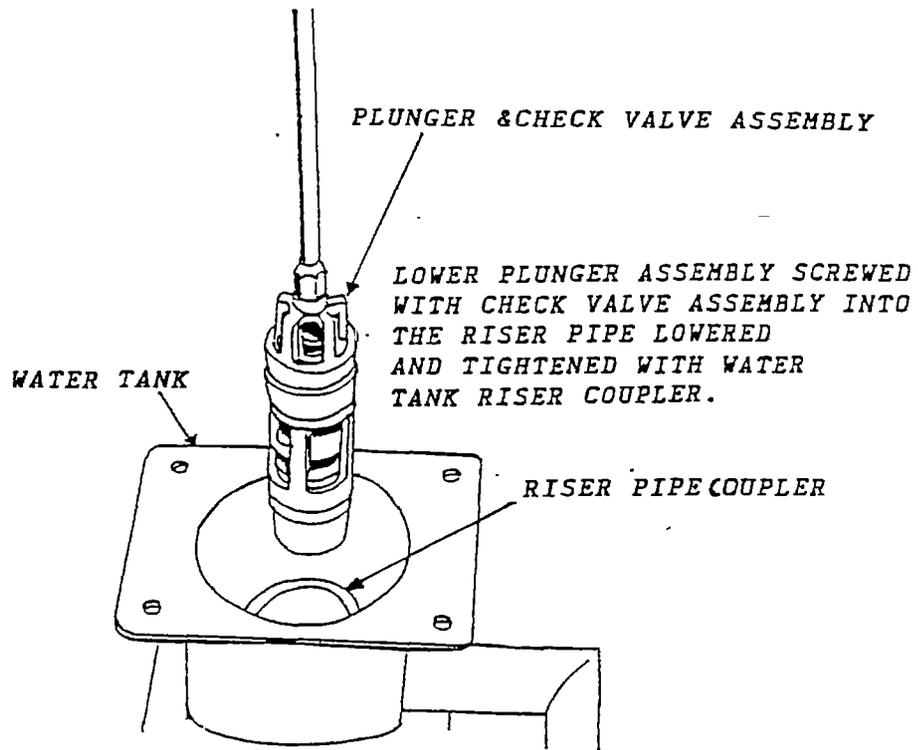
INSERT PLUNGER ASSEMBLY IN THE RISER PIPE
